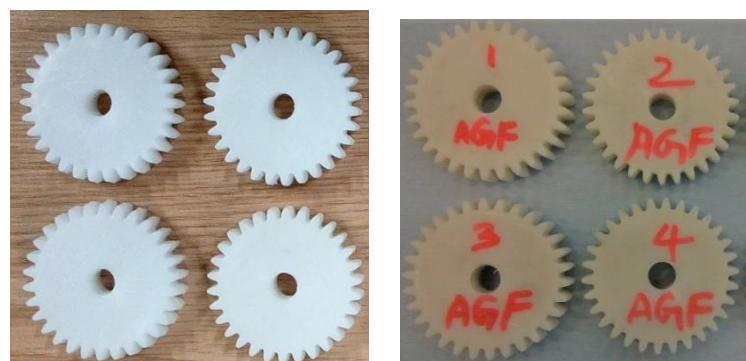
Molded POM (4 left) and GFR POM gears (4 right)
